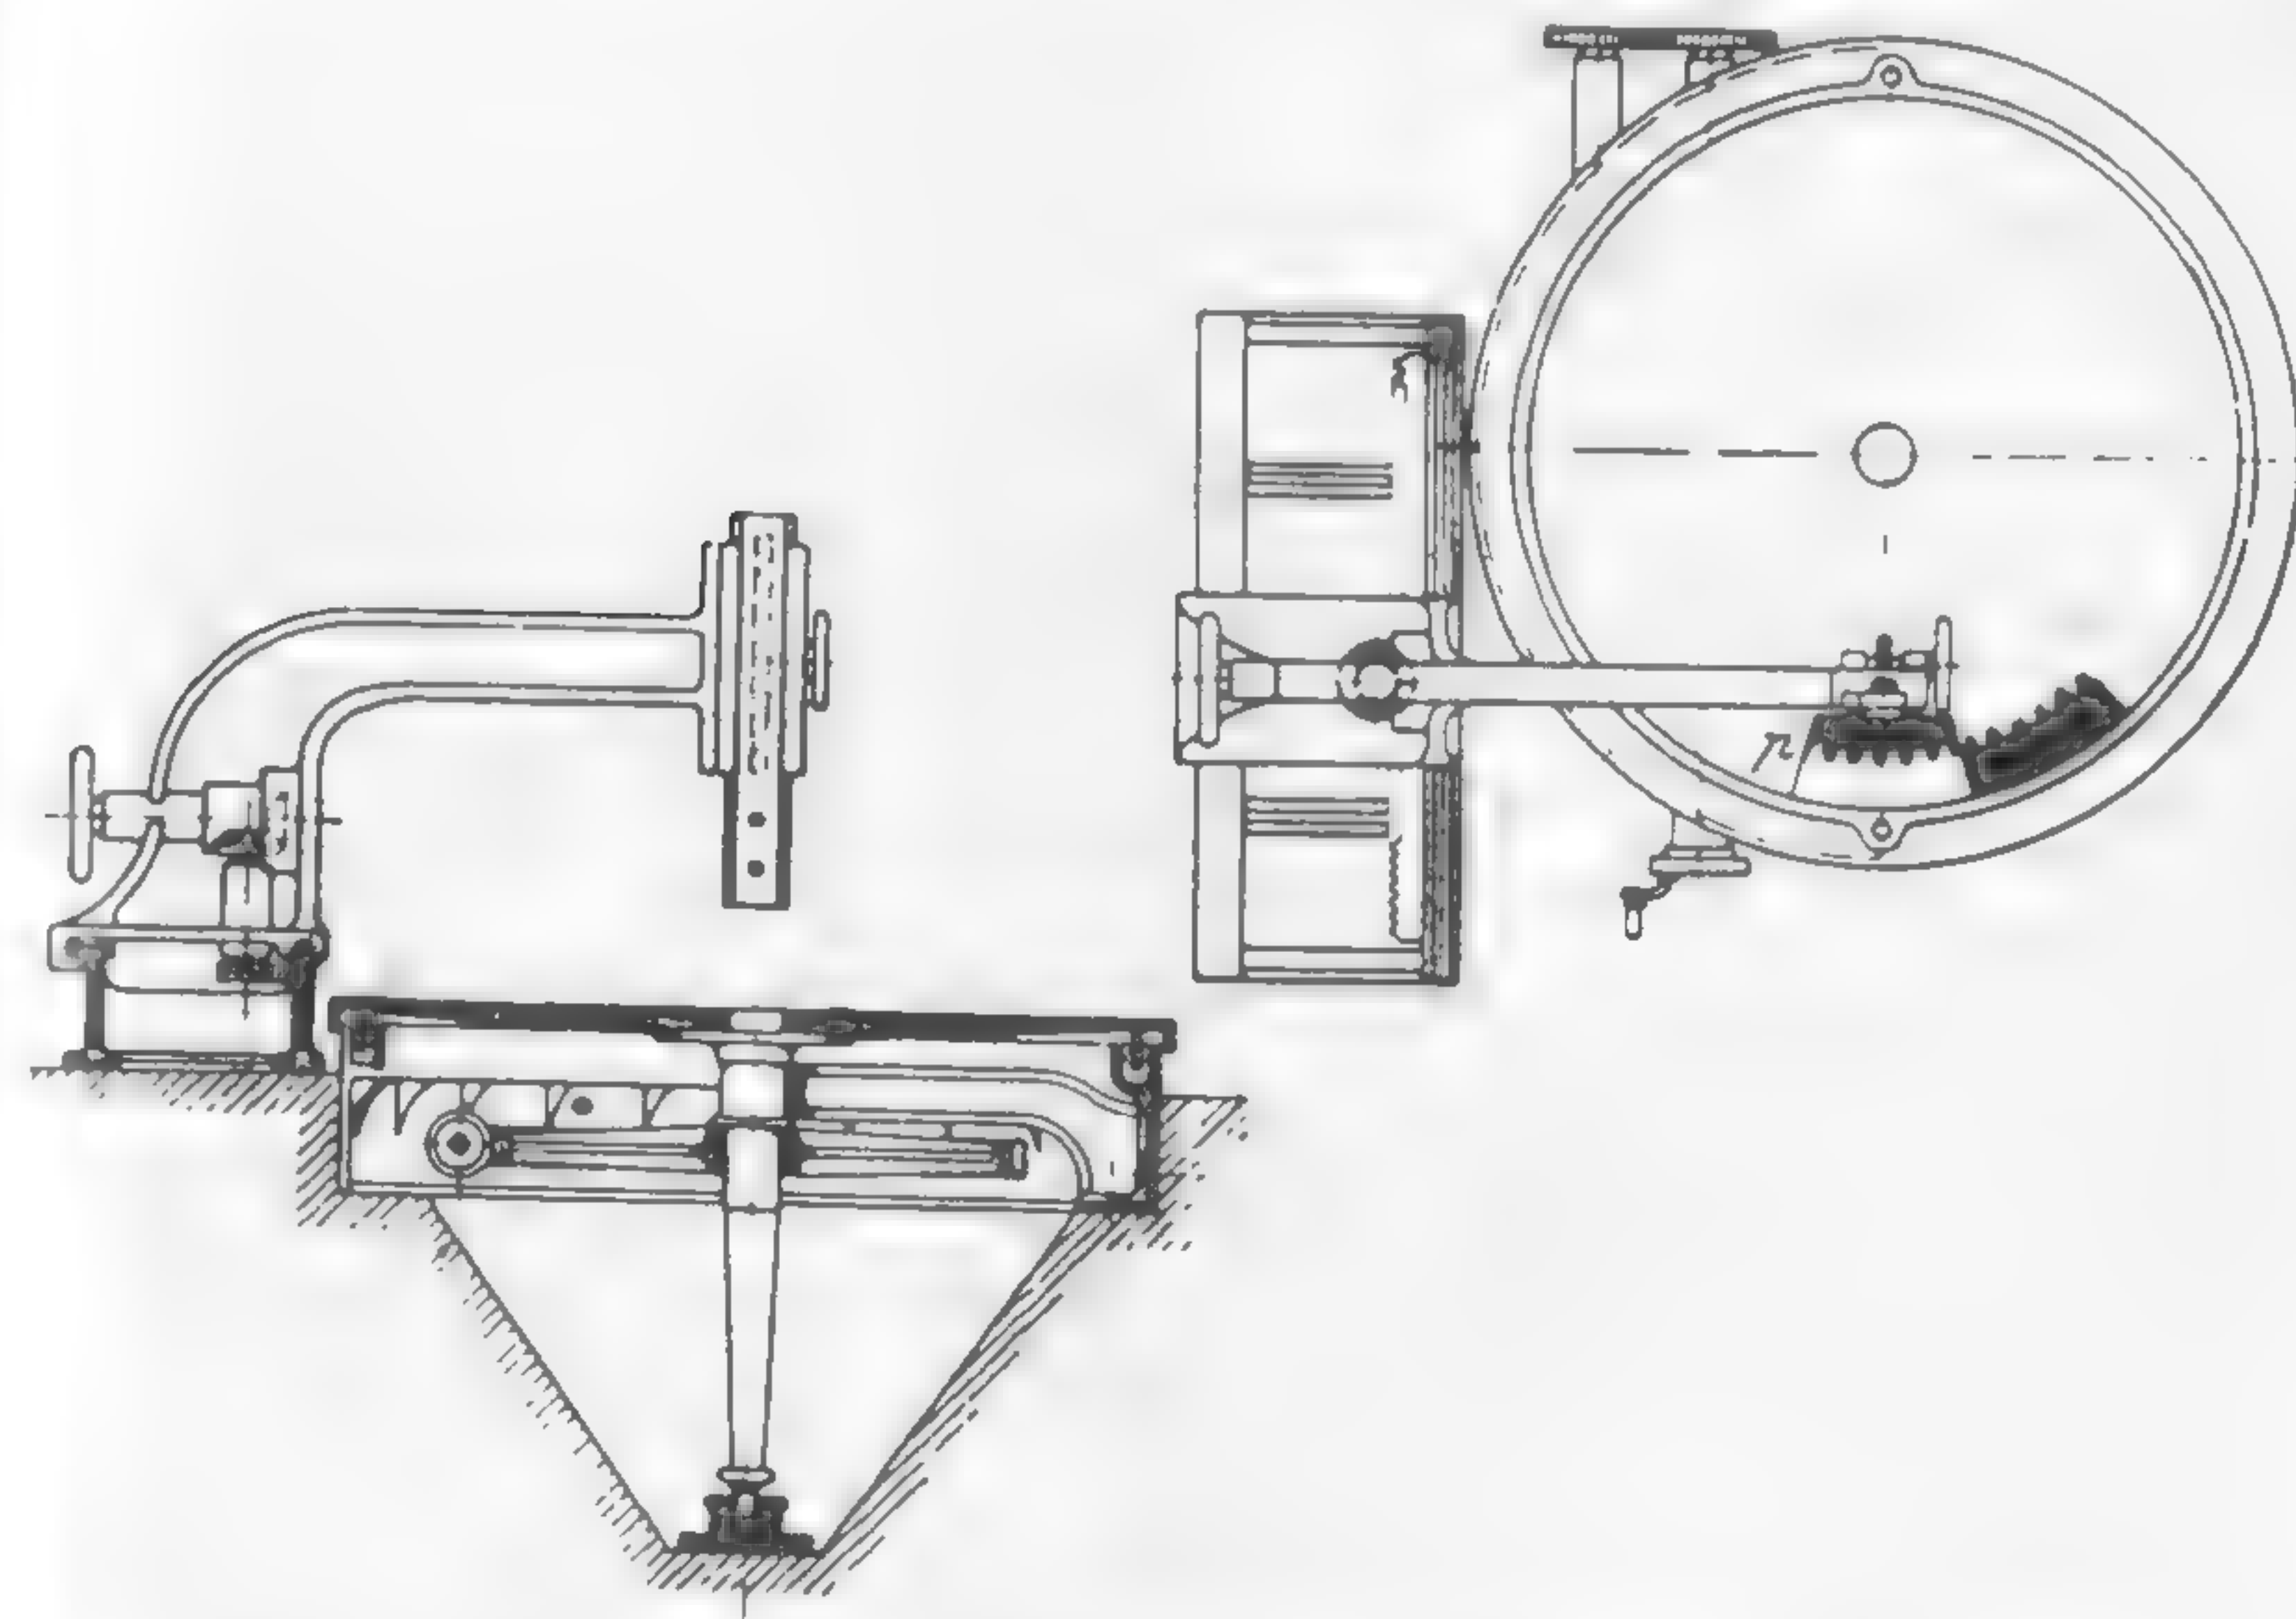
JACKSON'S GEAR-MOLDING MACHINE, 1844 (*Lohse*)
